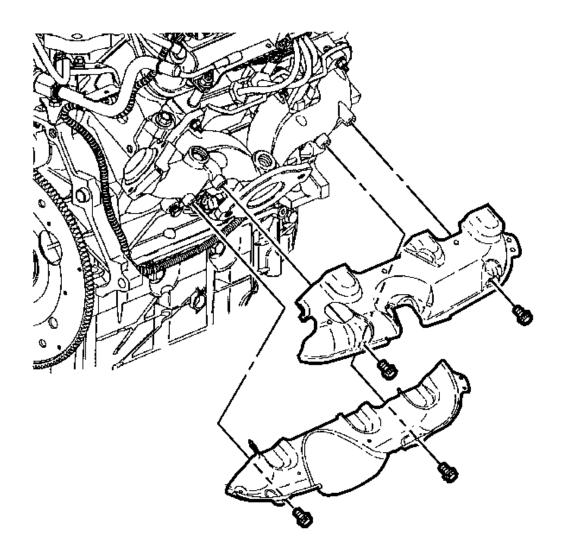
View Of Right Exhaust Manifold Heat Shields & Bolts Courtesy of GENERAL MOTORS CORP.
